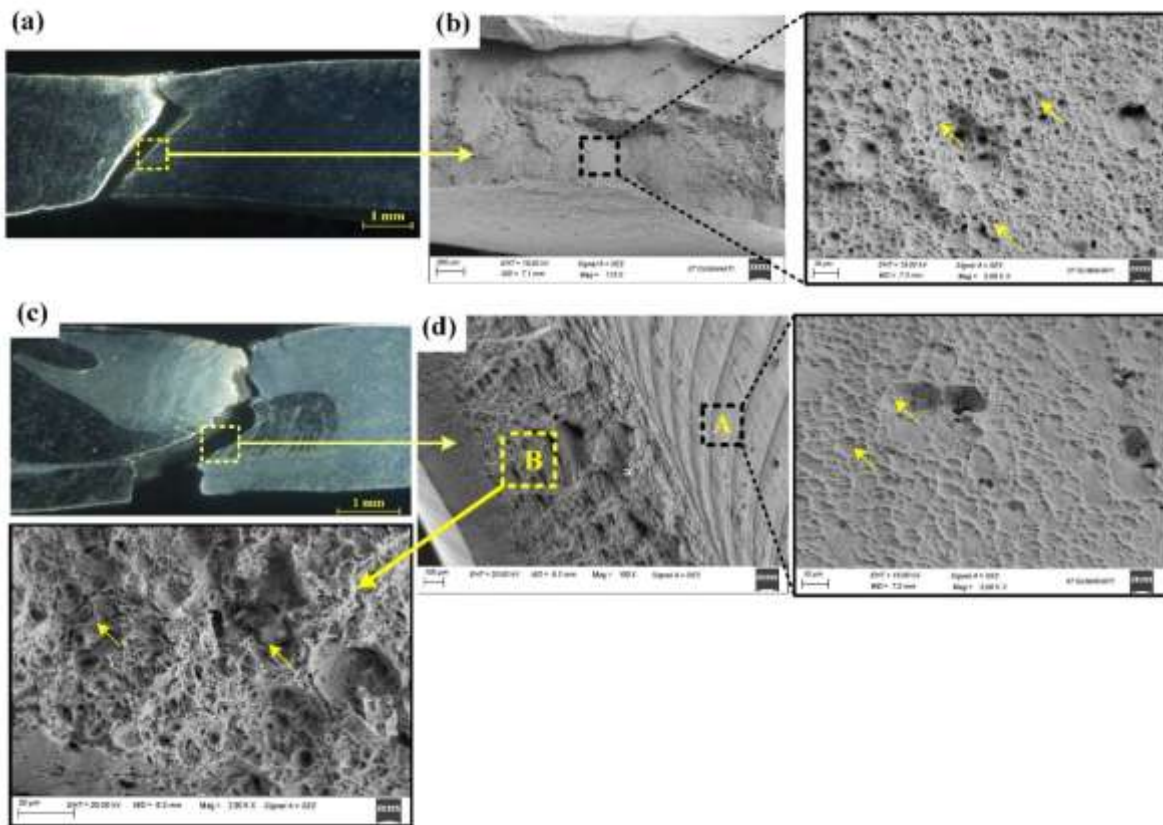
Fracture morphologies of tensile tested specimen: cross-sections of (a) FSW (300 rpm-70 mm/min) and (b) I-FSW (300 rpm-140 mm/min) failure joints and their corresponding (b and d) FESEM images.
